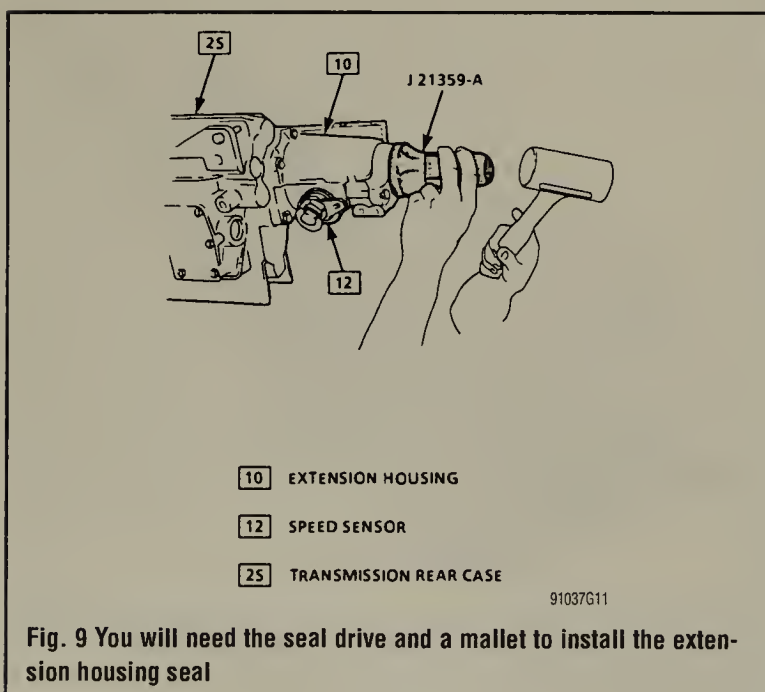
You will need the seal drive and a mallet to install the extension housing seal
